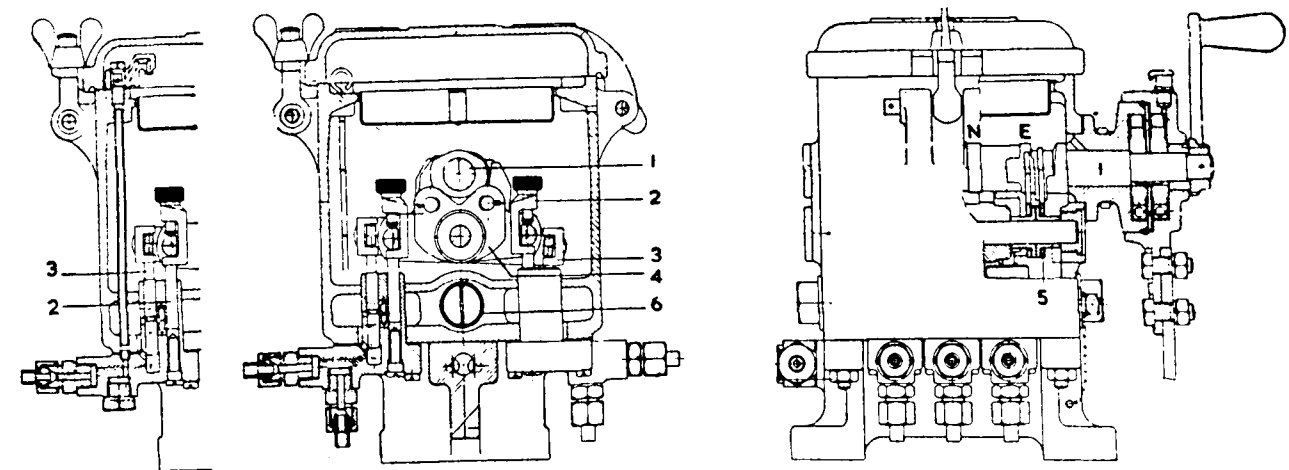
Sectional drawing of the Type F.S.A. Lubricator. LH drawing shows method of converting pumping units to single feeds instead of double ones.
